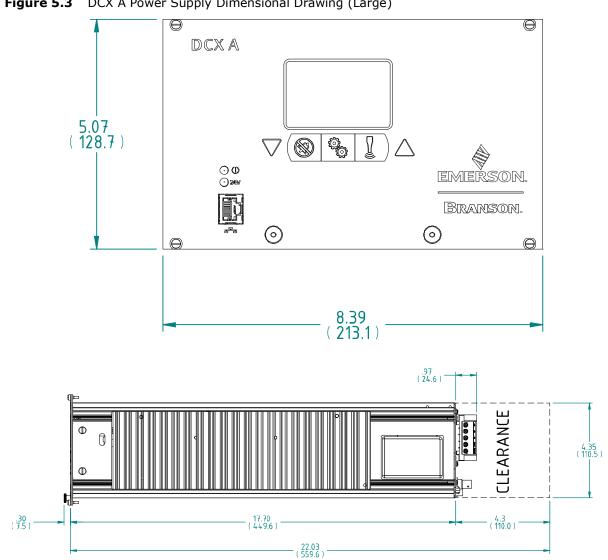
DCX A Power Supply Dimensional Drawing (Large)
